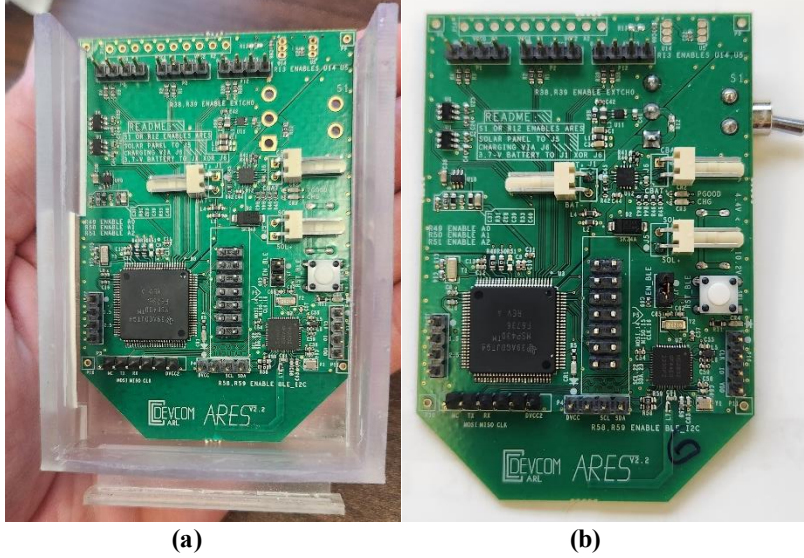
(a) The ARES PCB inside a 3D-printed case. The case measures approximately $2.5 \times 3.5 \times 0.5$ inches. (b) Top-down view of the 2023 ARES PCB with a power switch soldered.
